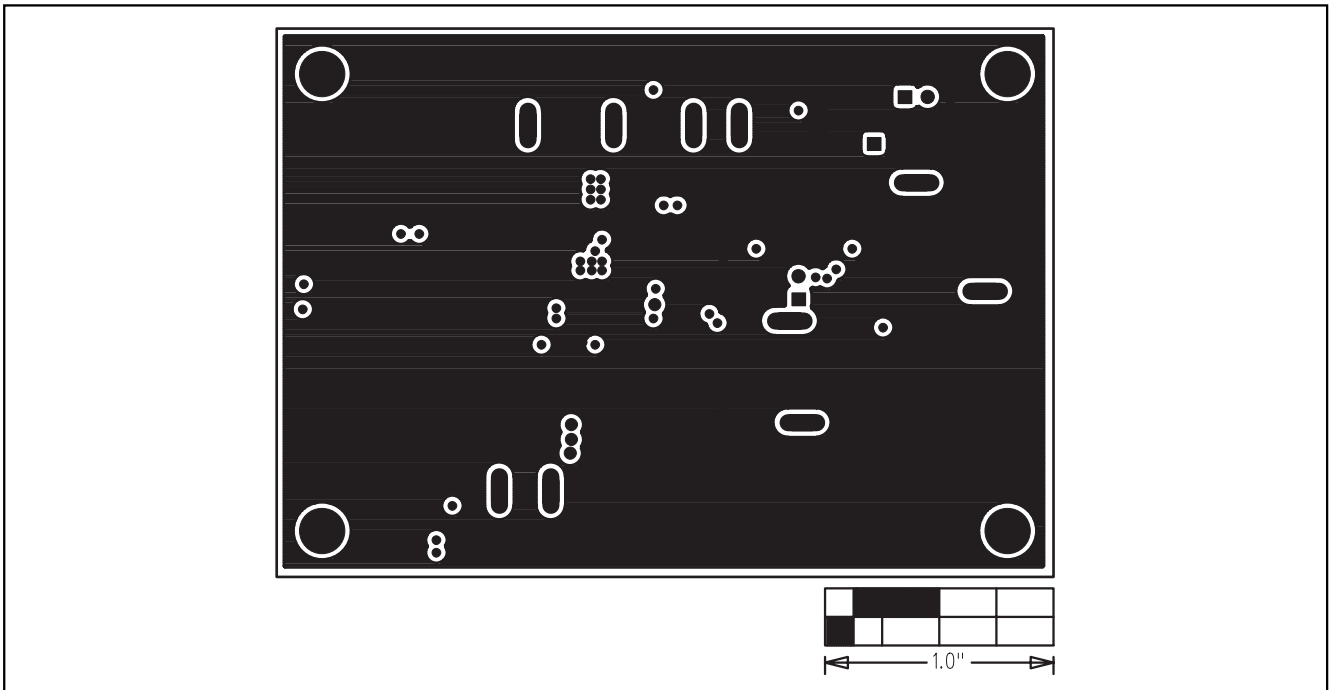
MAX8513 EV Kit PC Board Layout—GND Layer 3
